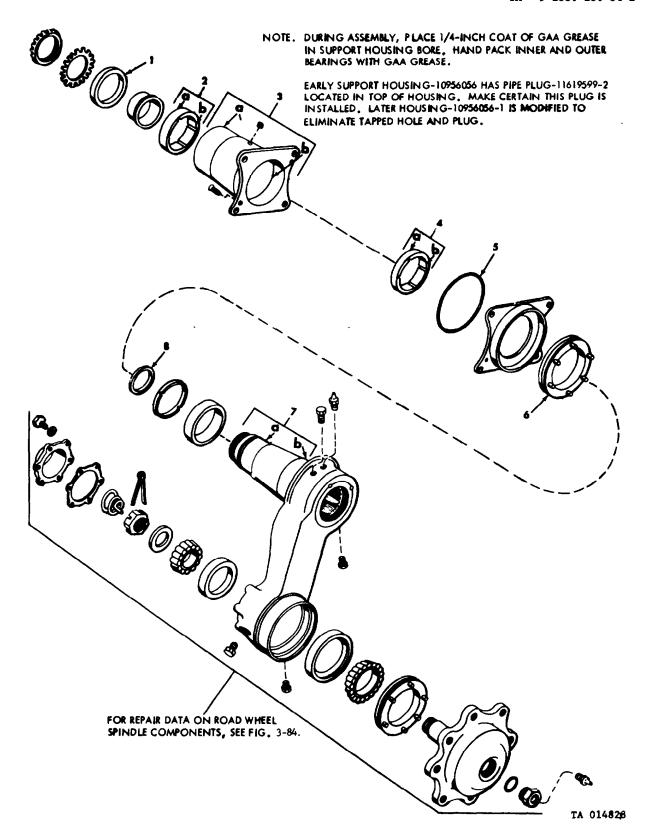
Roadwheel arm assembly - positions 2 and 3 - repair data.
